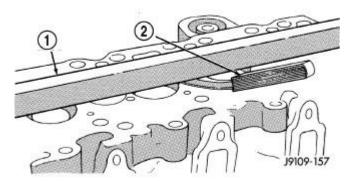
Inspecting Cylinder Head Combustion Deck Face For Warpage Courtesy of CHRYSLER GROUP, LLC
